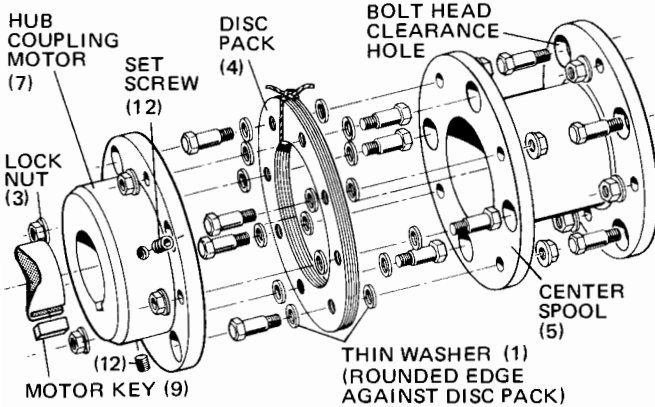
CENTER SPOOL WITH DISC PACK ASSEMBLED TO MOTOR HUB
